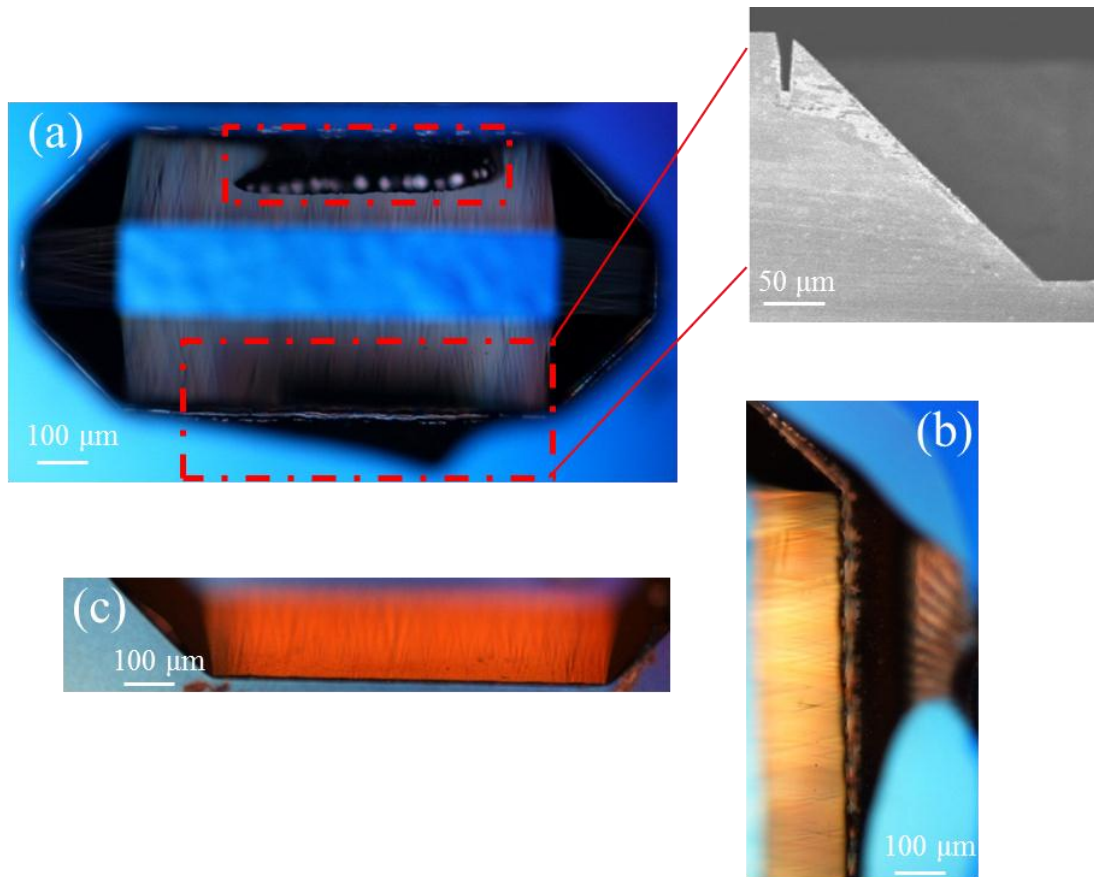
Damage and defect by ICP process after treatment (a) on 45° mirror surfaces, enlarged area and SEM of cross-section in dash box, (b) on the edge of the 45° mirror with gold coating, (c) better mirror surfaces with gold coating after improvement of ICP process.
